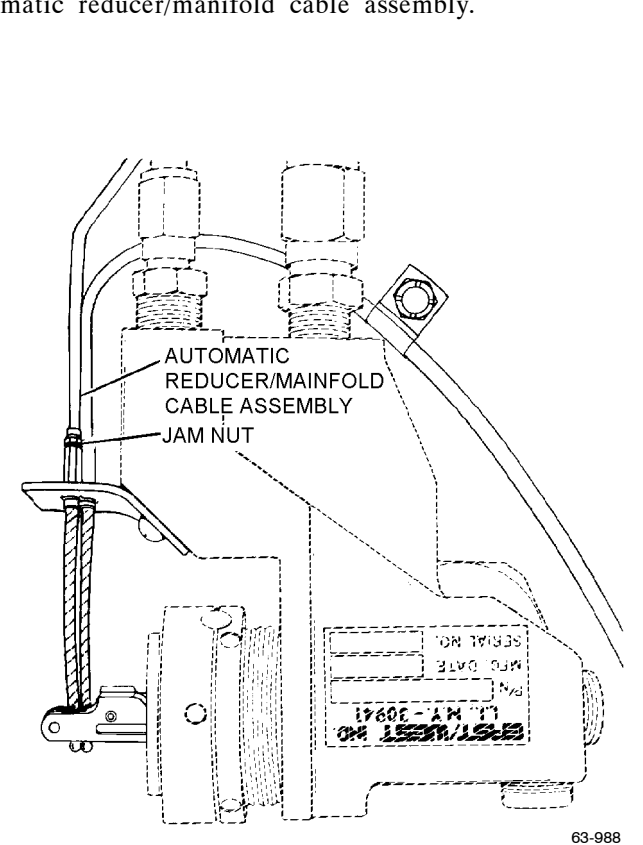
Reducer/Manifold Assembly P/N 741370-1 Cable Routing
